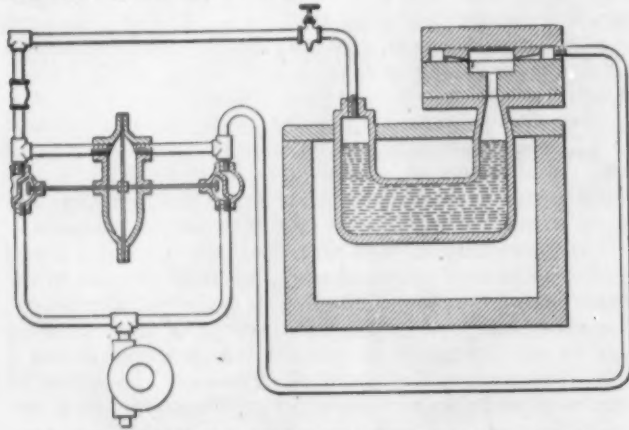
DIE-CASTING MACHINE WITH VACUUM APPLIED DIRECTLY TO DIE.
